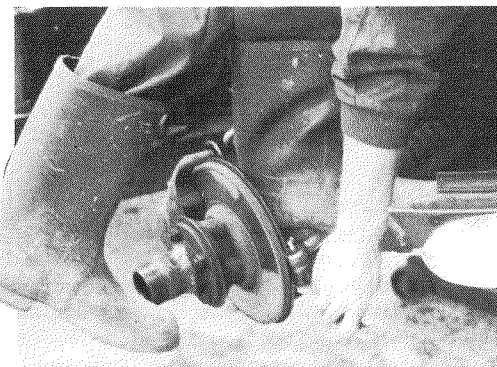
Not much left now: Screw on the track rod ends and tighten the clamping nuts. Push the joints into the steering linkage and tighten the lower nuts. Sometimes a bit of weight on top of the joint is required to stop the stud from rotating as you attempt to tighten the nut.
